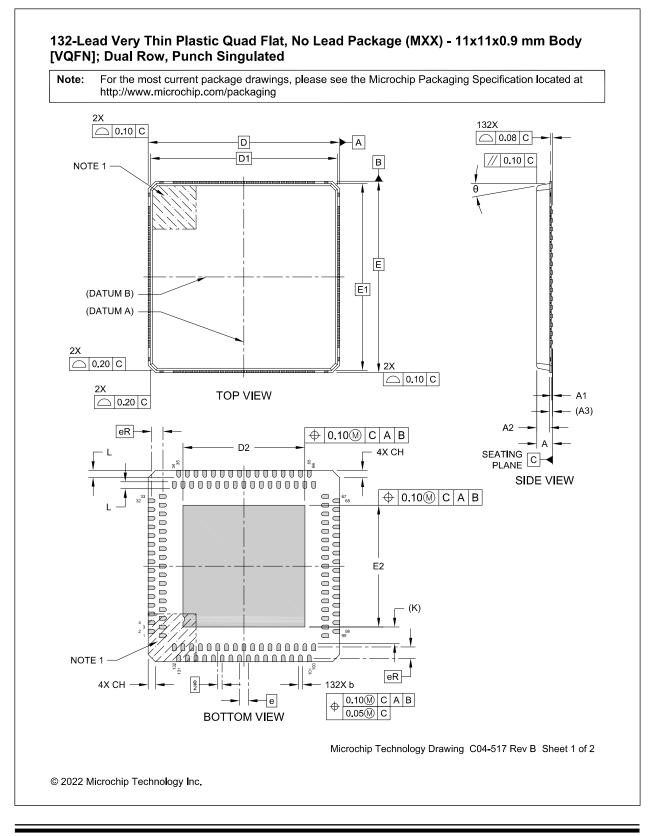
132-DRQFN PACKAGE (DIMENSIONS)
